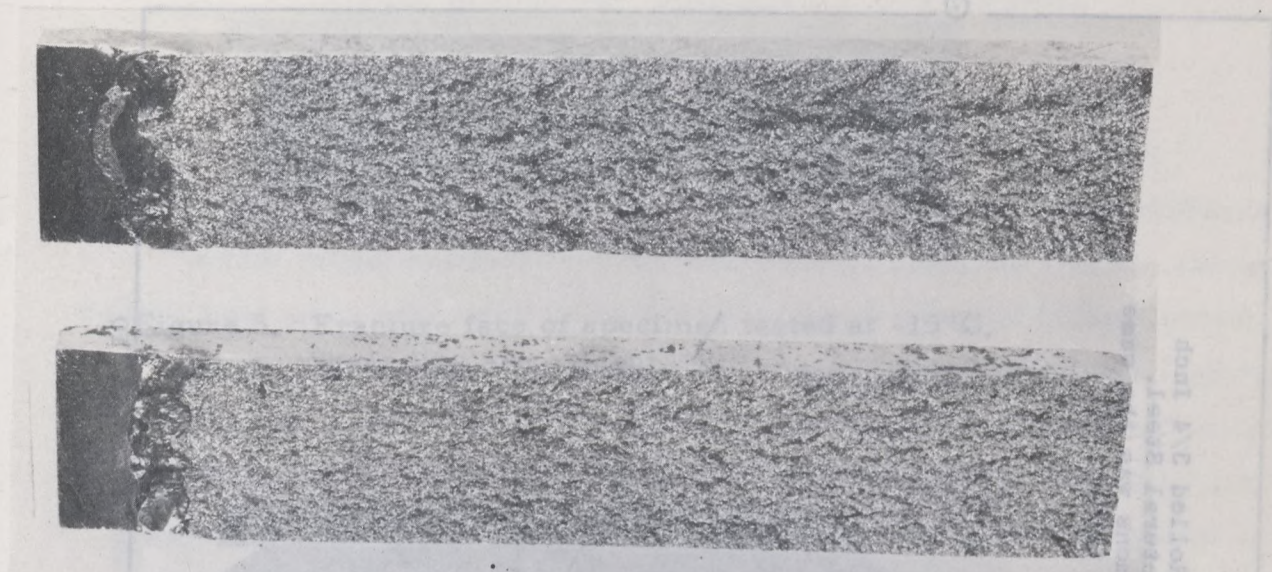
Brittle fractures obtained in mild steel plate, using weld-filler starter. Tensile test temperatures,  $-14^{\circ}\text{C}$  and  $-73^{\circ}\text{C}$  respectively.
